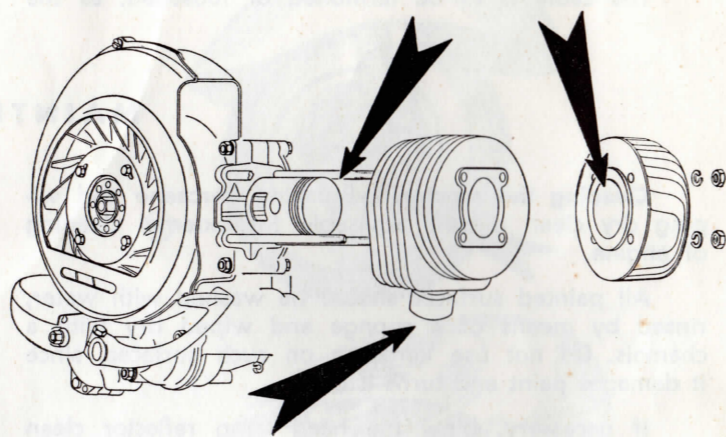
Cleaning the cylinder head, cylinder and piston
